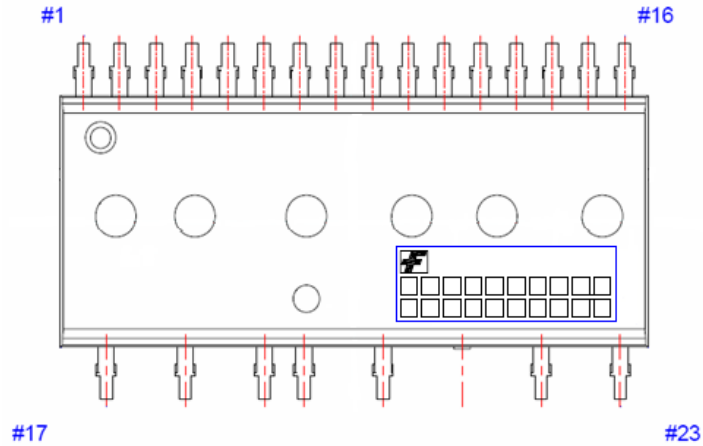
Marking layout of Package SPM23-BA type(bottom side)
